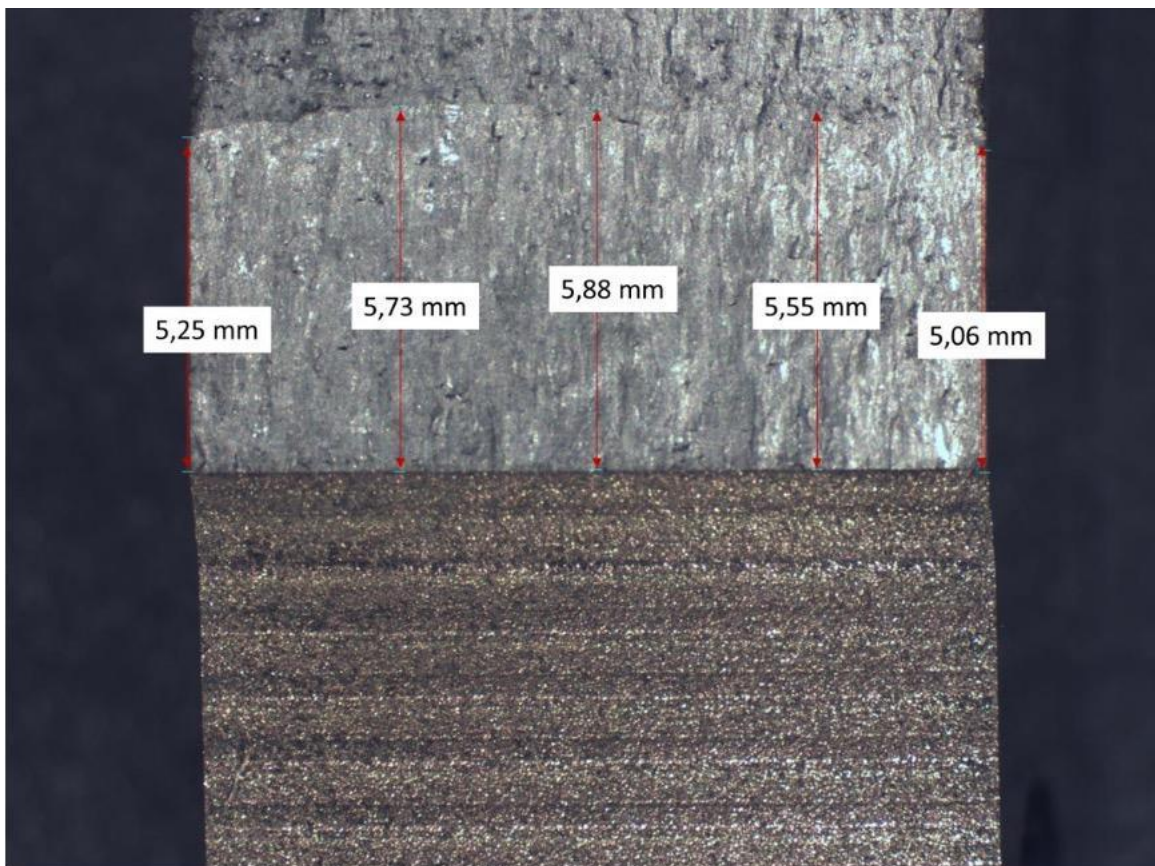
Fracture toughness crack measurement for 6.25 m/s 3
